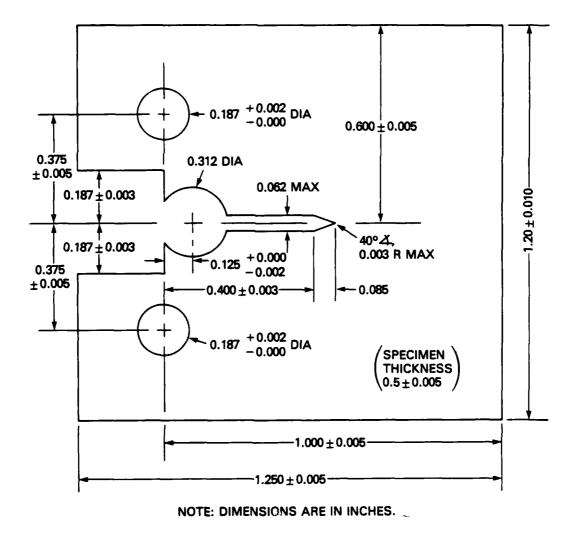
Modified 1/2-Inch-Thick (12.7-mm) Compact Test Specimen for J-Integral Testing
